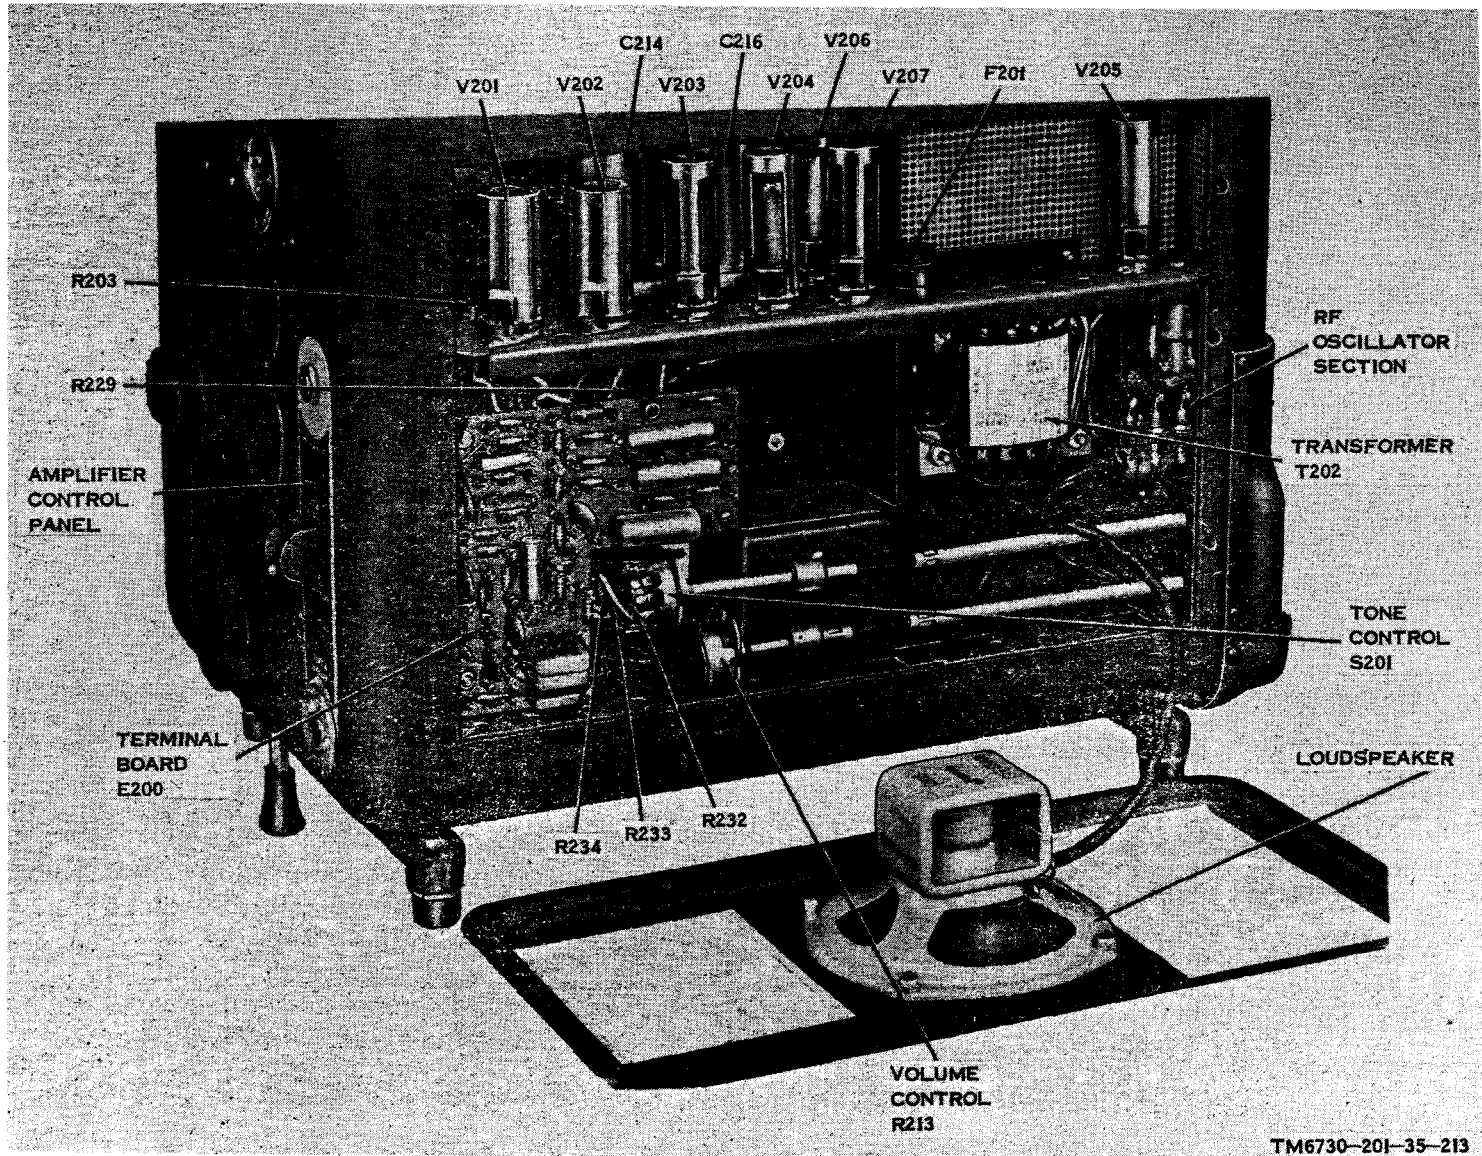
Projectors AQ-2A(1) and AQ2A(2), front view of amplifier, loudspeaker panel removed.
